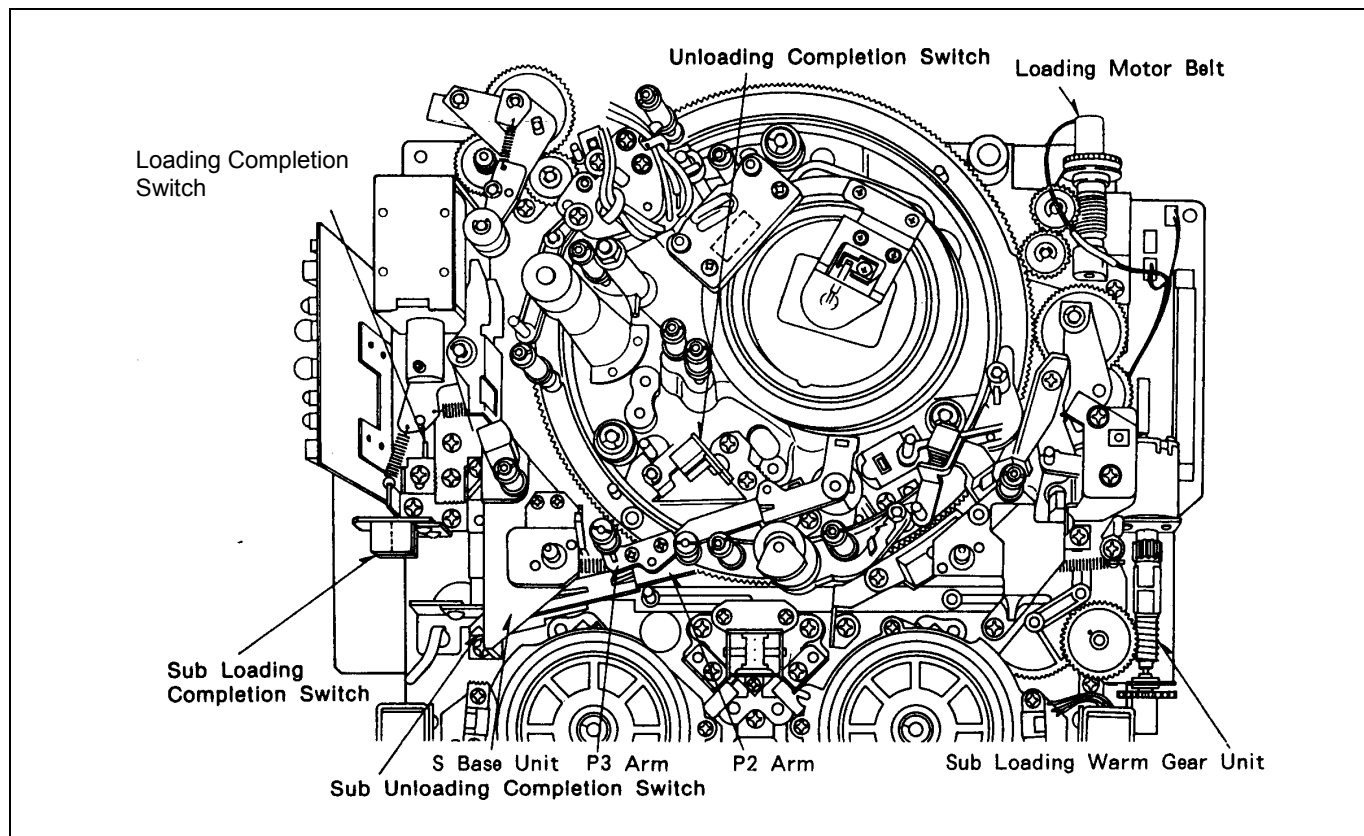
Loading/Unloading, Sub Loading/Sub Unloading Completion Switch
